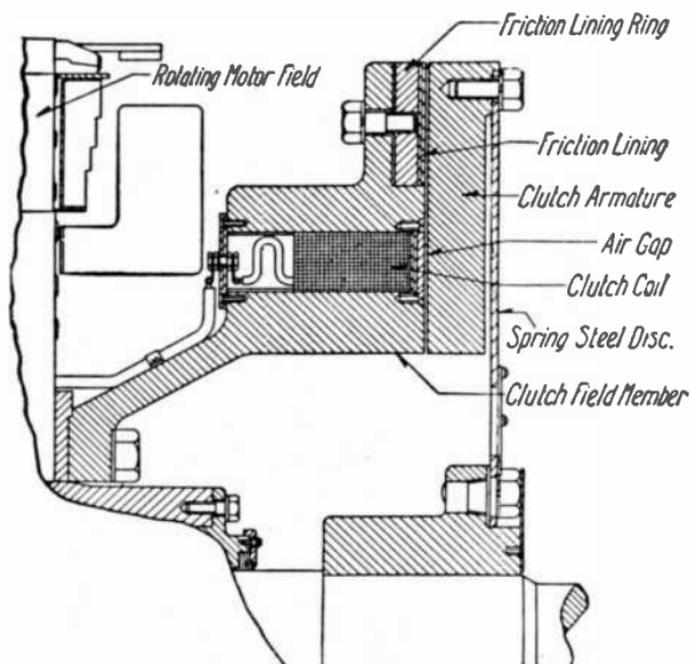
,521.—Sectional view of Westinghouse magnetic clutch type synchronous motor built in magnetic clutch. *In construction*, positive clearance between clutch plates when the clutch is unexcited is assured by the use of the spring plate construction. The armature member of the clutch is mounted on a steel disc which has sufficient flexibility to allow the clutch faces to make contact when the clutch coil is excited, but which will spring back into normal position when the clutch coil is released. Dragging of the clutch faces when the coil is not excited cannot take place. The coil is secured in place in the field member by means of a brass ring. Exciting coils can be wound for either 125 or 250 volts direct current. The energy required for excitation is very low, ranging from 250 watts for the smallest to 750 watts for the largest size clutch.
